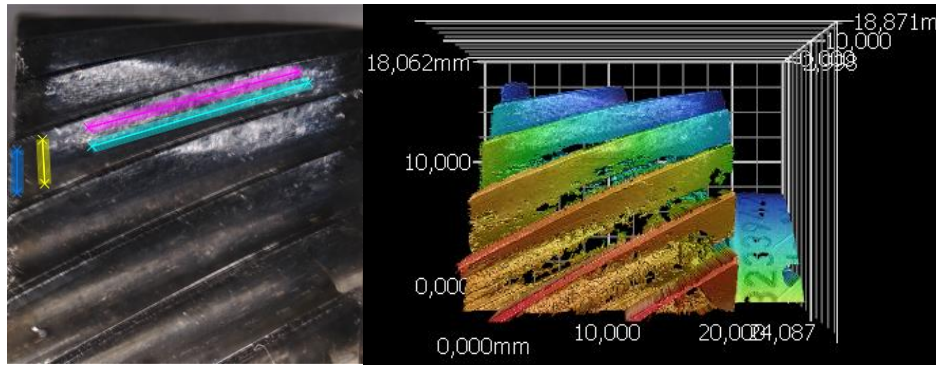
Optical measurement acquisition: Lead and profile measurements (right) and surface capture (left of a sun gear)
